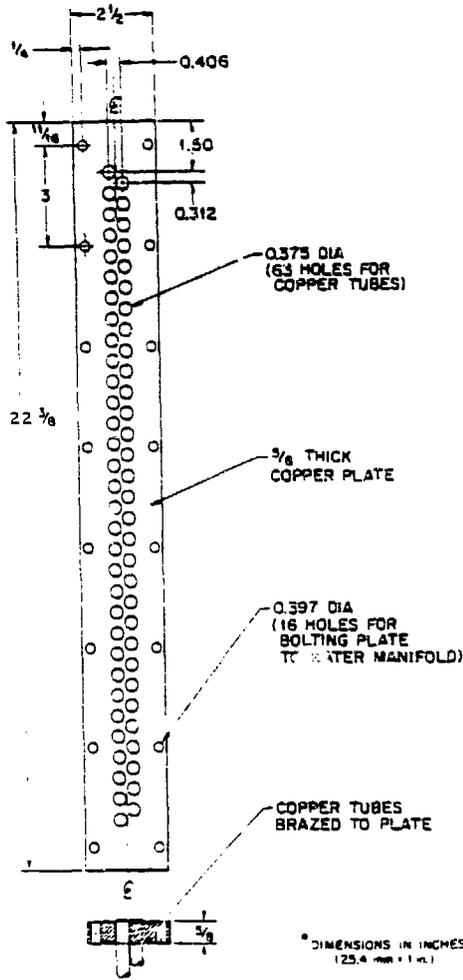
Drawing of copper plate used for copper tube/water manifold interfaces.
